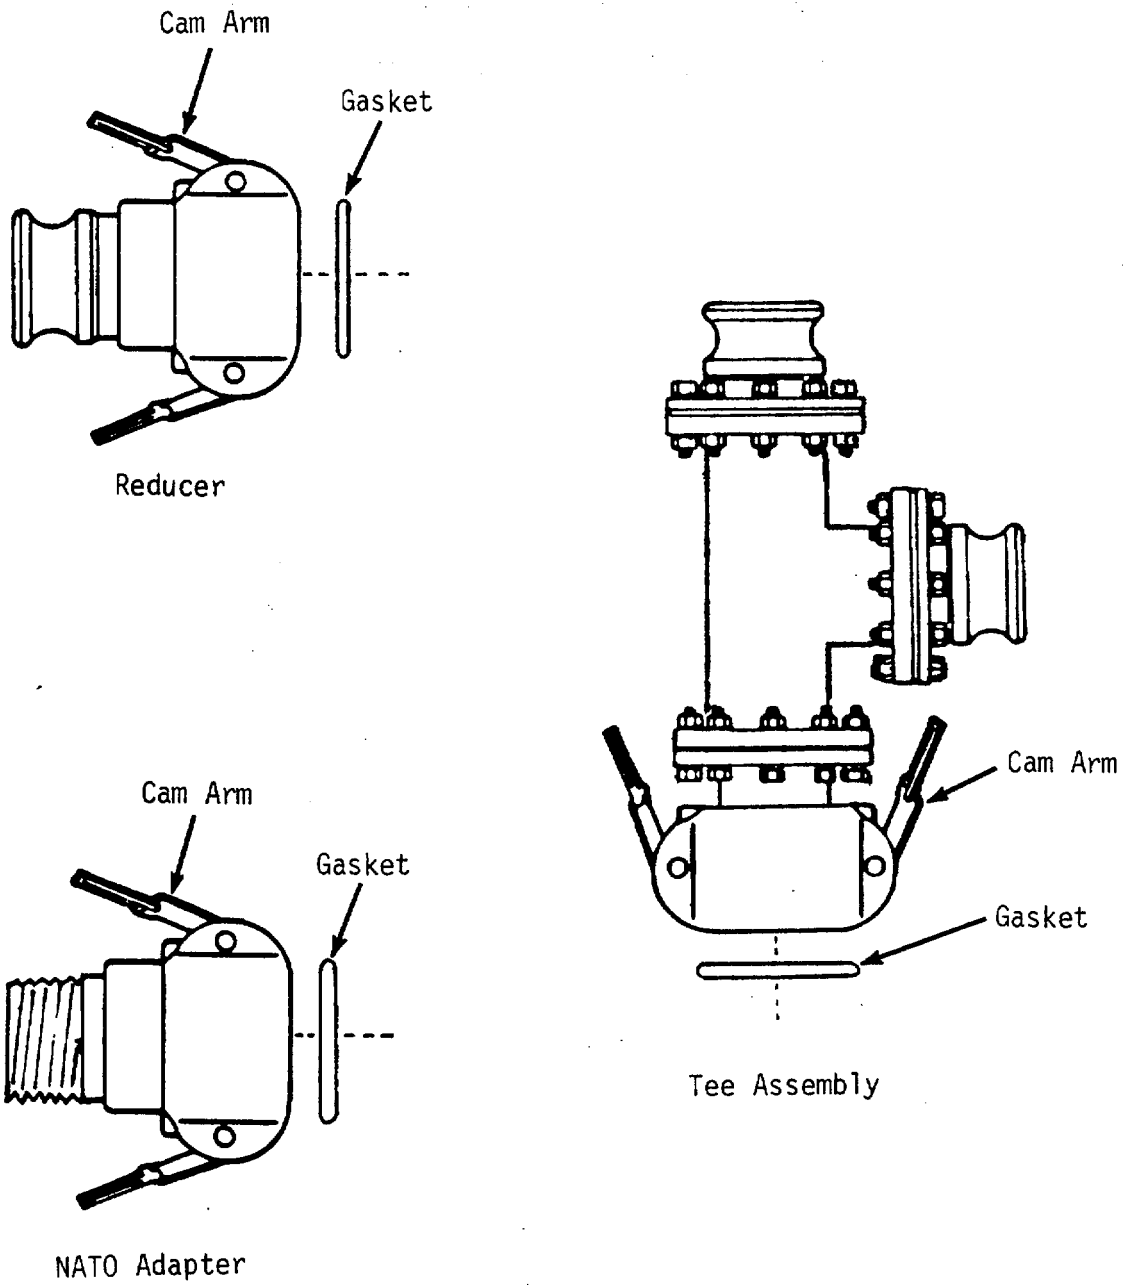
Tee Assembly, Reducer, NATO Adapter
